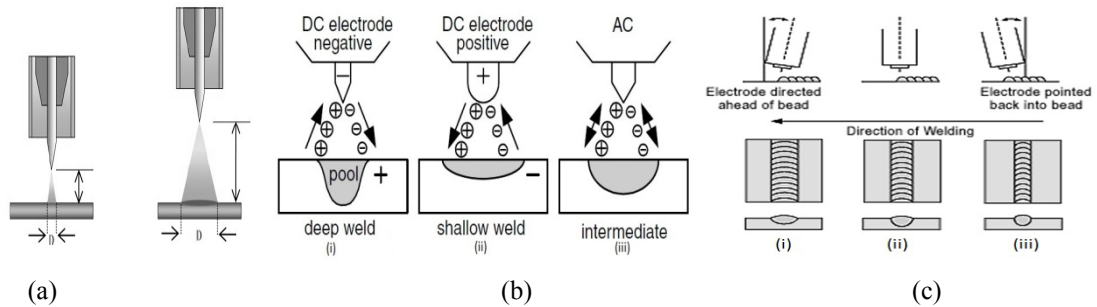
(a) Arc length on weld shape; (b) Effect of current polarity on weld shape; (c) Angle of the torch with welding direction
